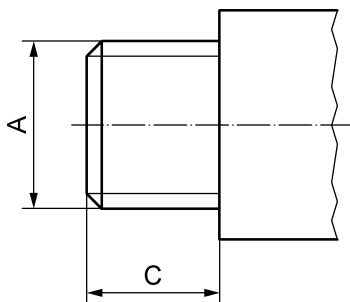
Threaded inlets of taps with visible body for mounting on vertical surfaces
